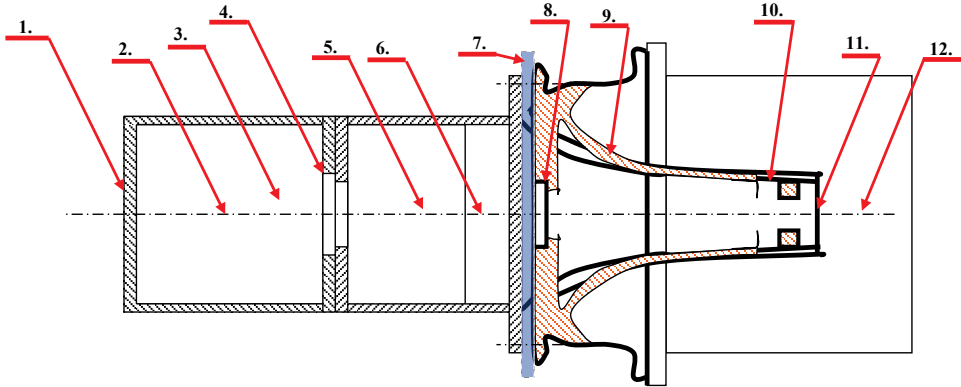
Cross-section of an SO-3 type single-flow, single-shaft engine with control rollers prepared for mechanical measurement of bearing seat concentricity: 1 – turbine body; 2 – external control mark of control roller No. 1; 3 – inspection roller No. 1; 4 – rear bearing seat; 5 – internal inspection mark of inspection roller No. 1; 6 – internal inspection mark of inspection roller No. 2; 7 – spacer between the compressor body and the turbine body; 8 – central bearing seat; 9 – compressor body; 10 – rear bearing seat; 11 – inspection roller No. 2; 12 – external inspection mark of inspection roller No. 2
